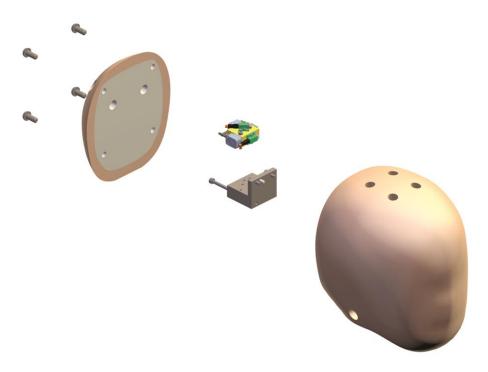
Head instrumentation – both accelerometer bracket arrangements
